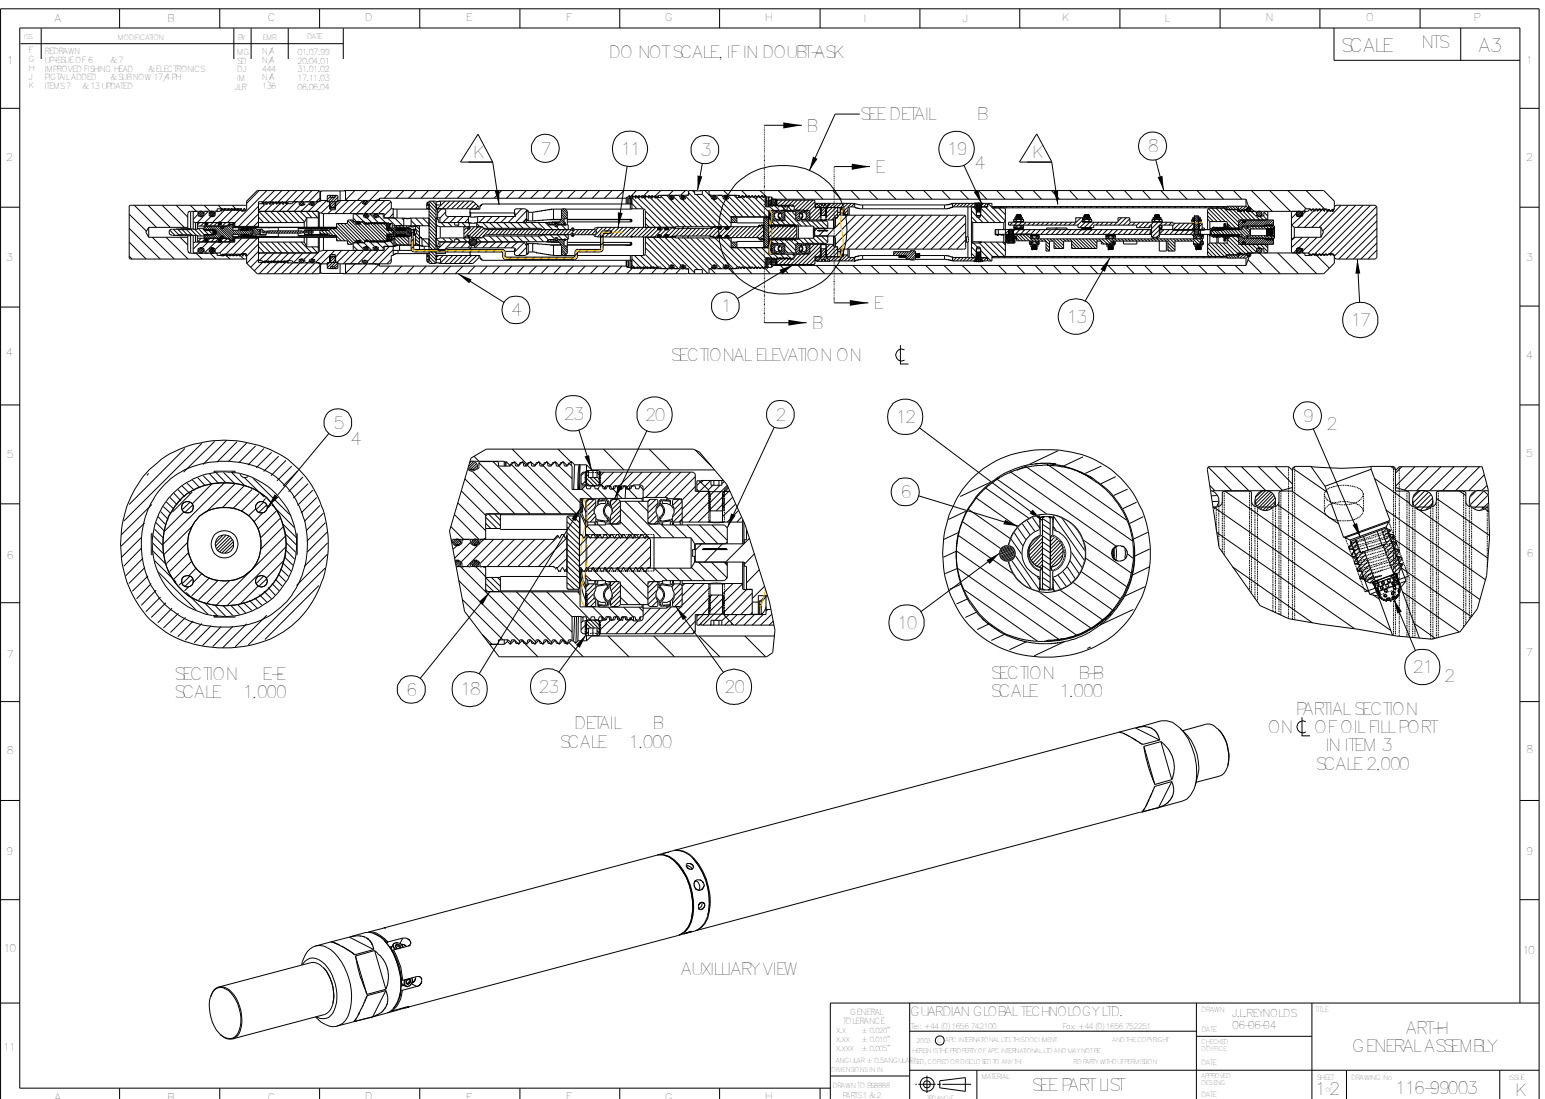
General Assembly Drawing, ART-H - 116-99003-K
